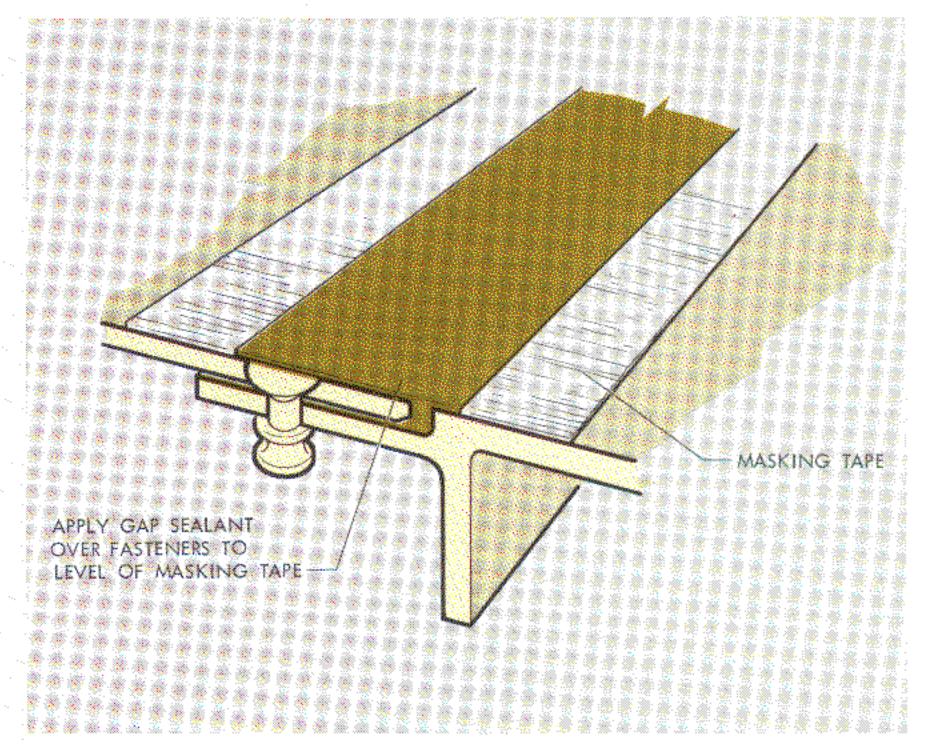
Method of Applying Sealant Over Steel Fasteners Installed in Wing Planks
